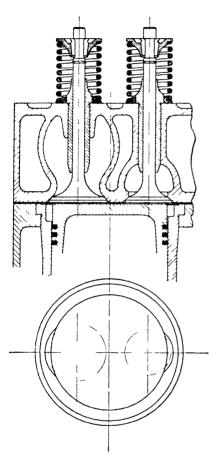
Section of cylinder head of a C I. engine showing valves overlapping the cylinder bore
